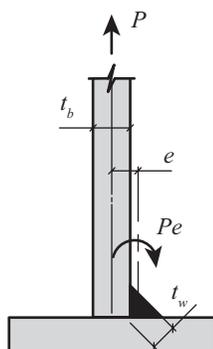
Eccentric loading on a single-sided fillet weld, resulting in local bending.
